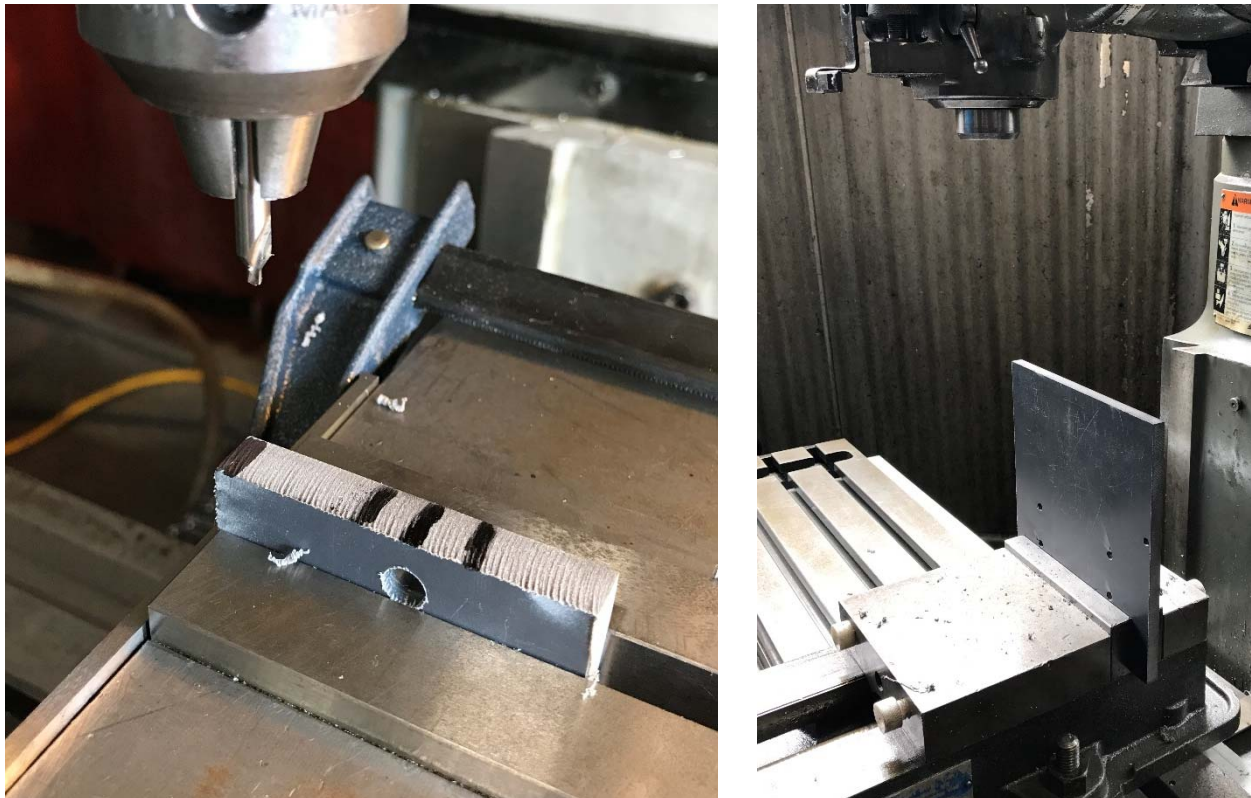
(left) Gear box components being machined on a mill. (right) One of the walls of the twisting housing on a mill.
